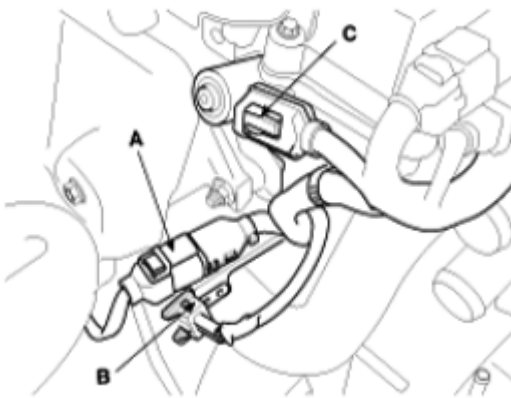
Identifying Front Oxygen Sensor Connector, CKP (Crankshaft Position Sensor) Connector And OCV (Oil Control Valve) Connector
